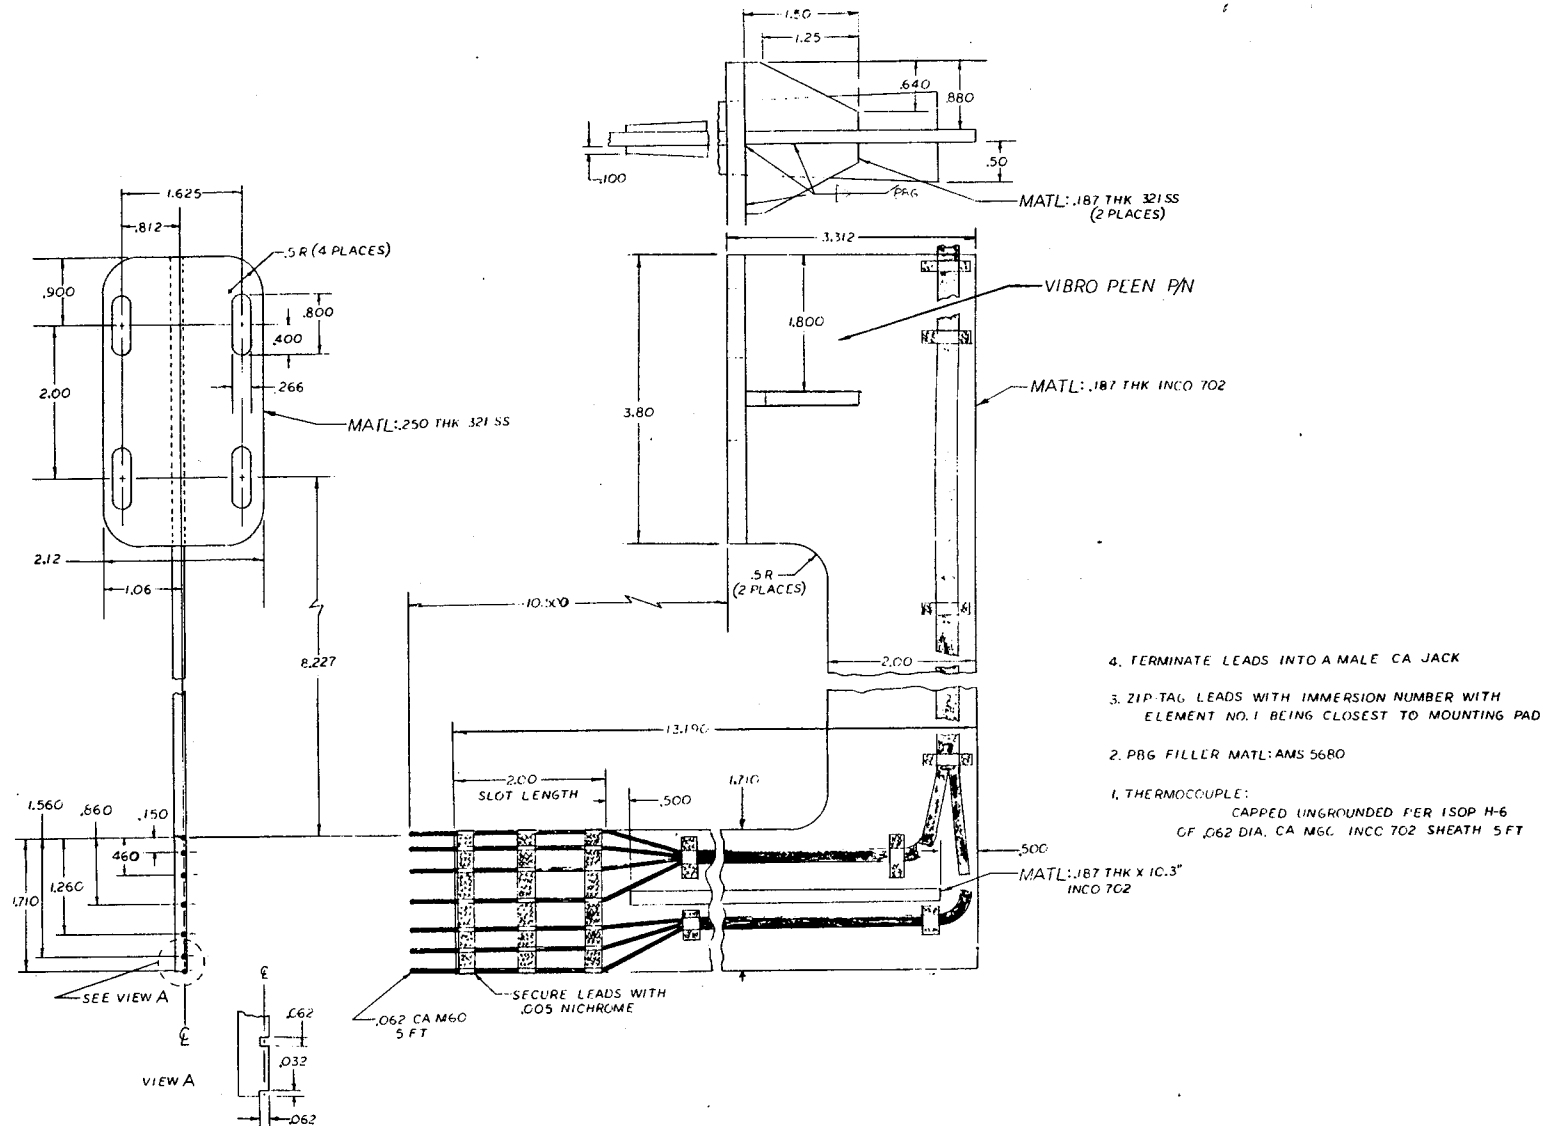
E³ Full-Annular Combustor EGT Thermocouple Rakes.
